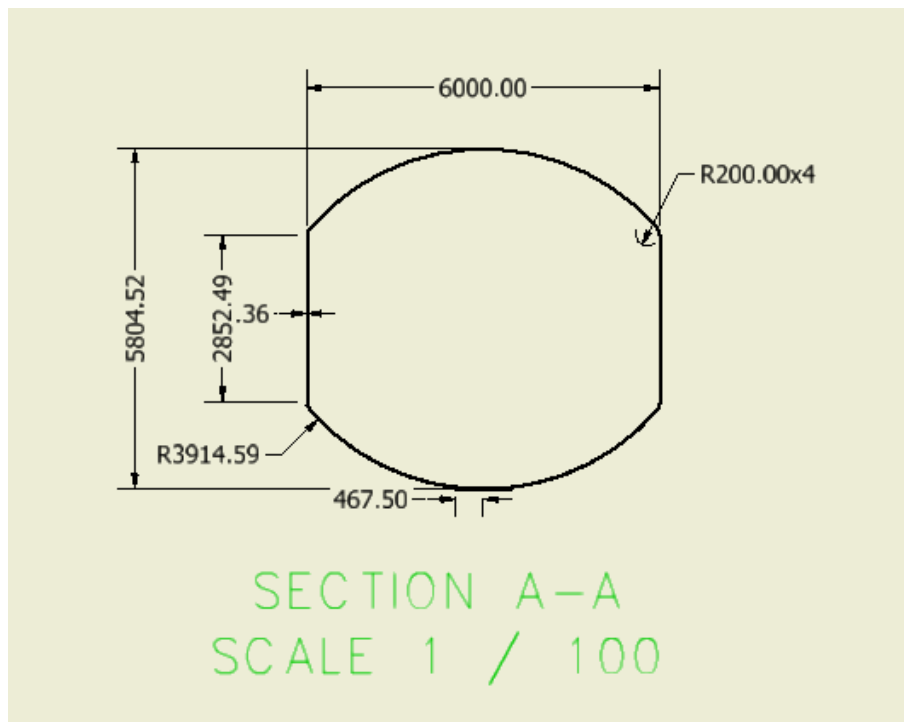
Full Dimensioned Drawing of LH2 Fuel Tank (mm)
